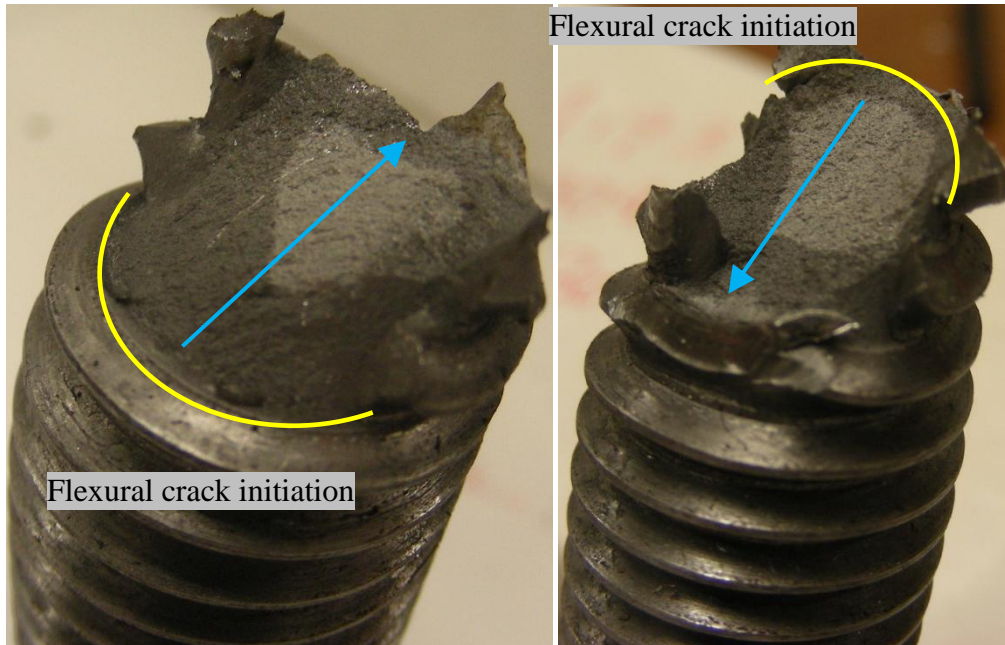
fracture surfaces of A307-4da-MD
